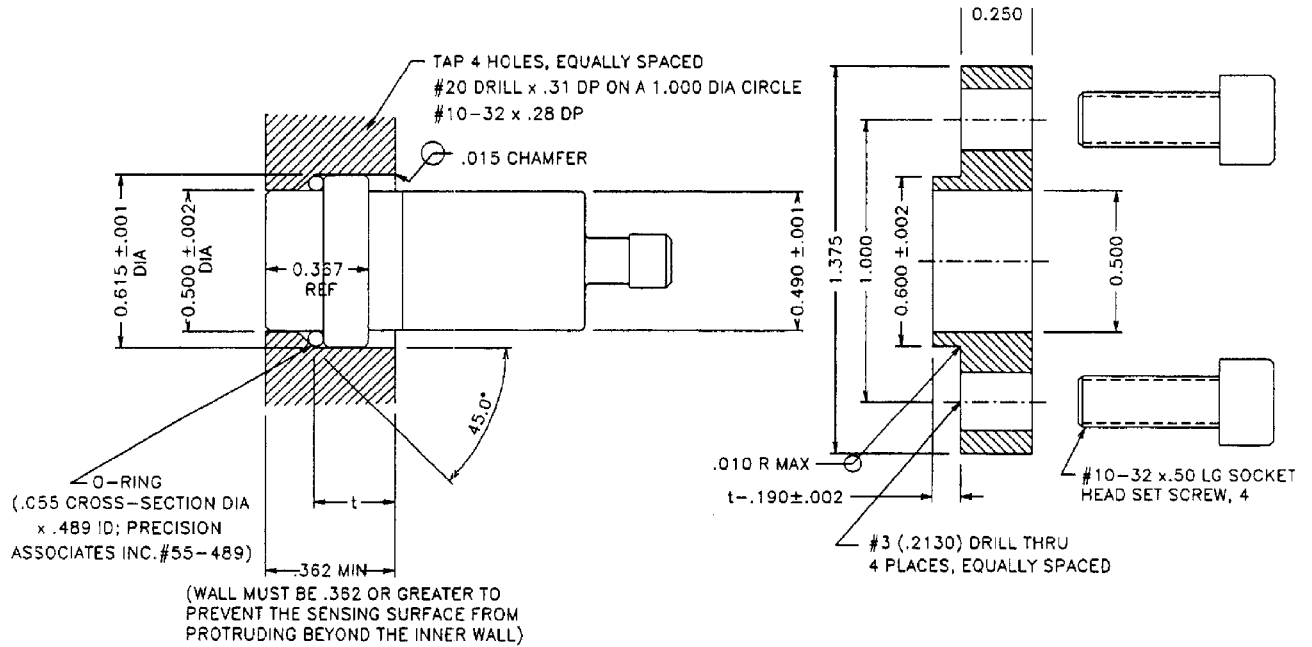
End user bores hole into area they desire to measure pressure and holds transducer in with bracket.
